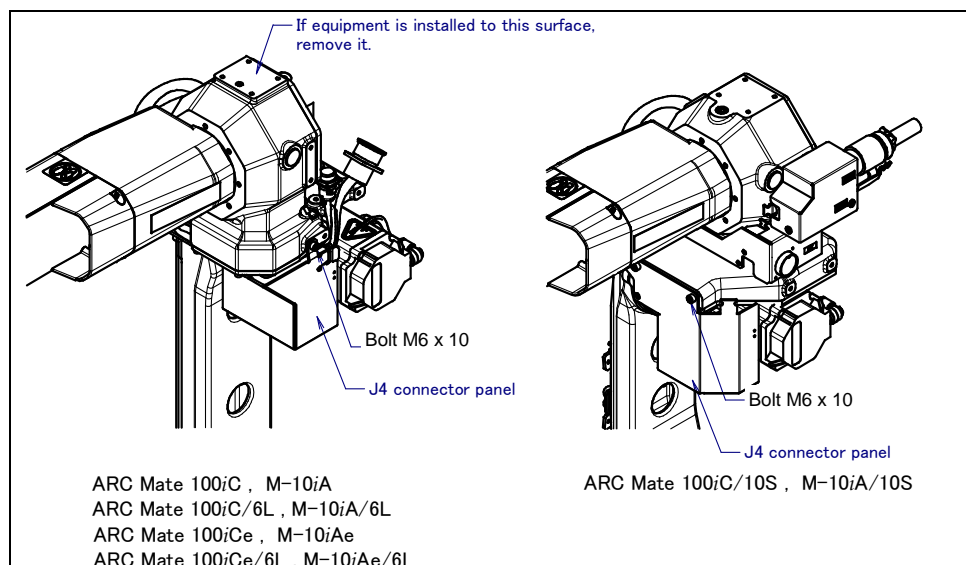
(d) Removing the J4 connector panel
